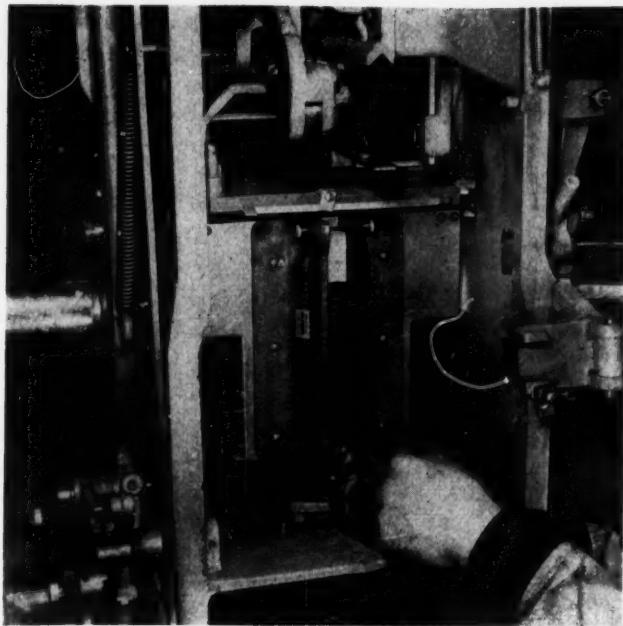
Above—Label holder for bottle labeling machine has molded-in, threaded inserts
